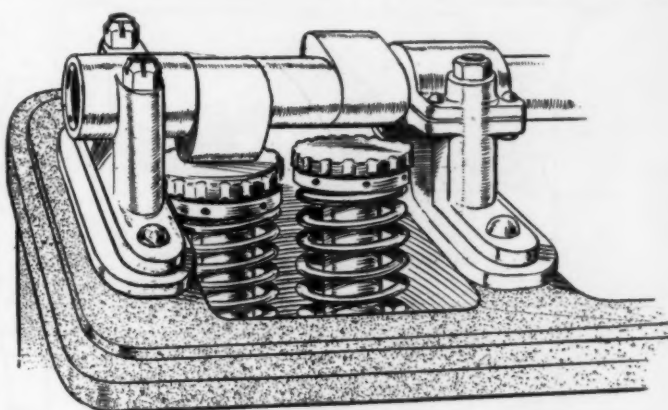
SKETCH SHOWING THE RELATIVE POSITION OF VALVE OPERATING CAMS THAT ACT DIRECTLY ON FOLLOWERS SECURED TO THE END OF THE VALVE-STEM IN THE HISPANO-SUIZA ENGINE
